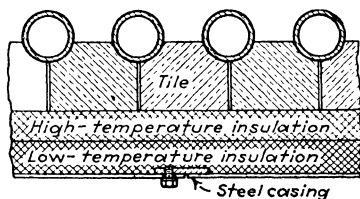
Bare waterwall tubes with refractory backing. (Foster Wheeler Company.)
